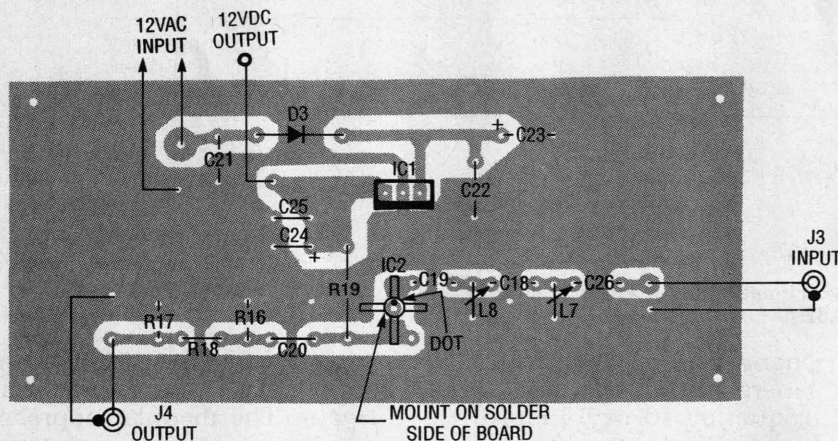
PARTS-PLACEMENT DIAGRAM for the amplifier/power supply board.
